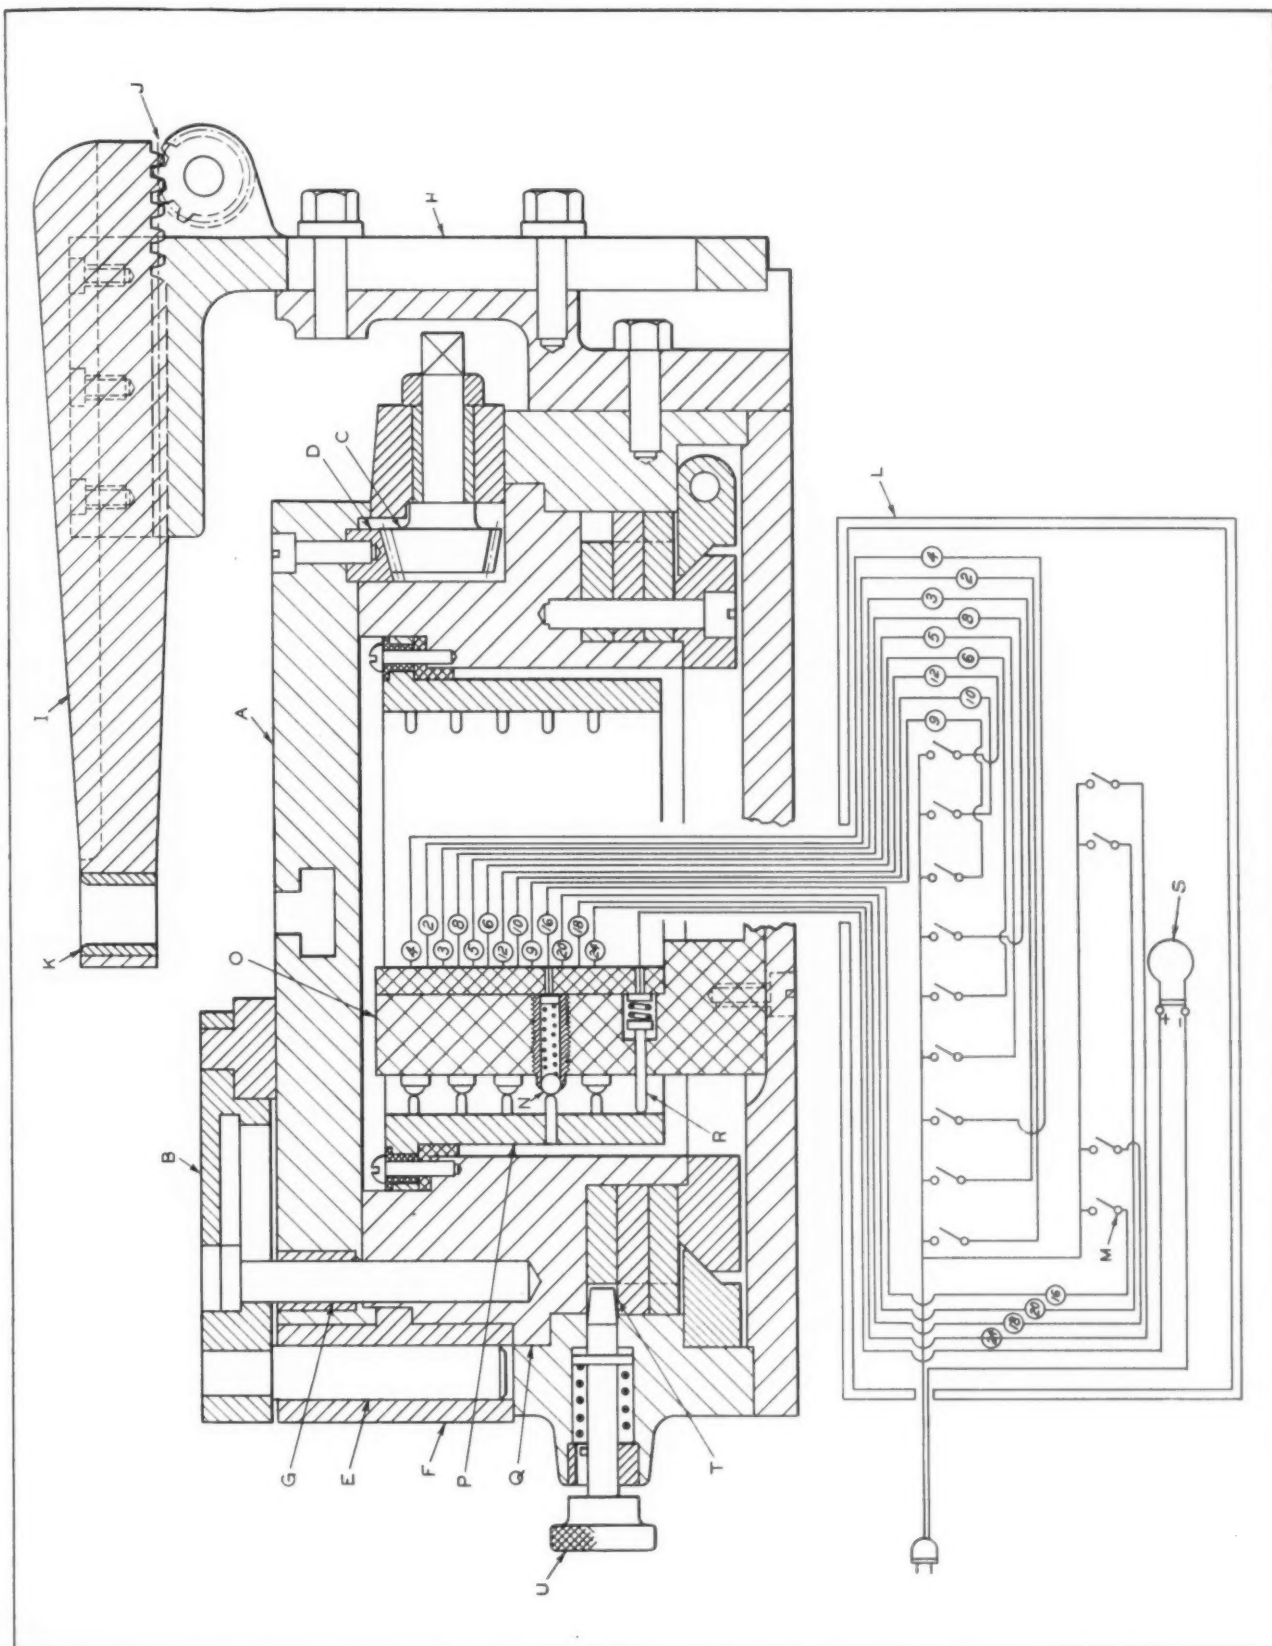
Electric Universal Drill Jig that can be Set to Automatically Indicate the Proper Drilling Positions for Thirteen Angular Lay-outs
